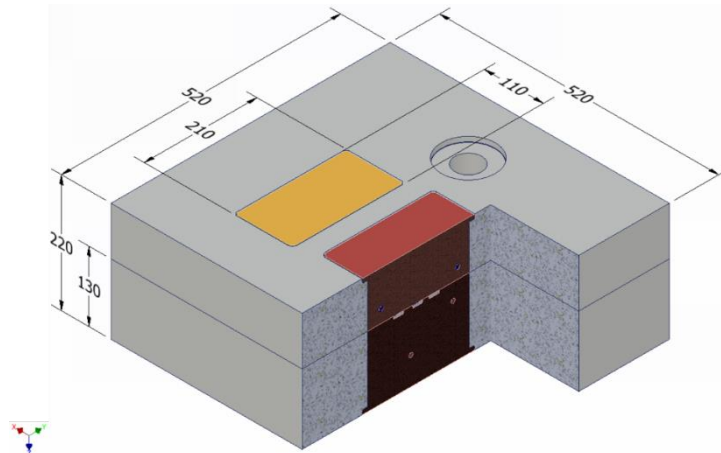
General mold's and insert's dimensions (dimensions in millimeters).
